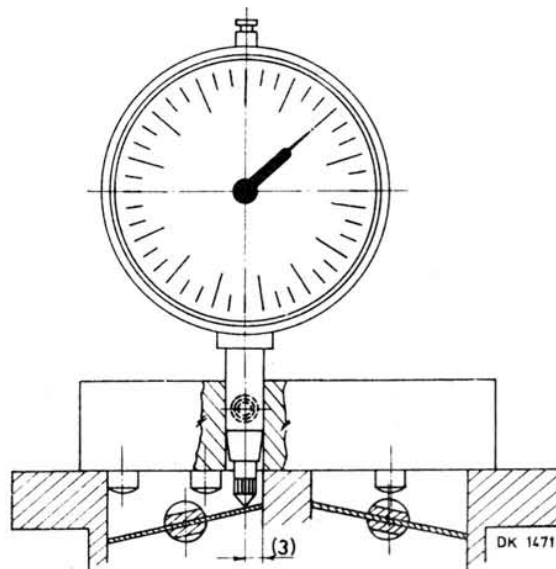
/8 - Adjusting Throttle Discs Using MP 1-120 Indicator
